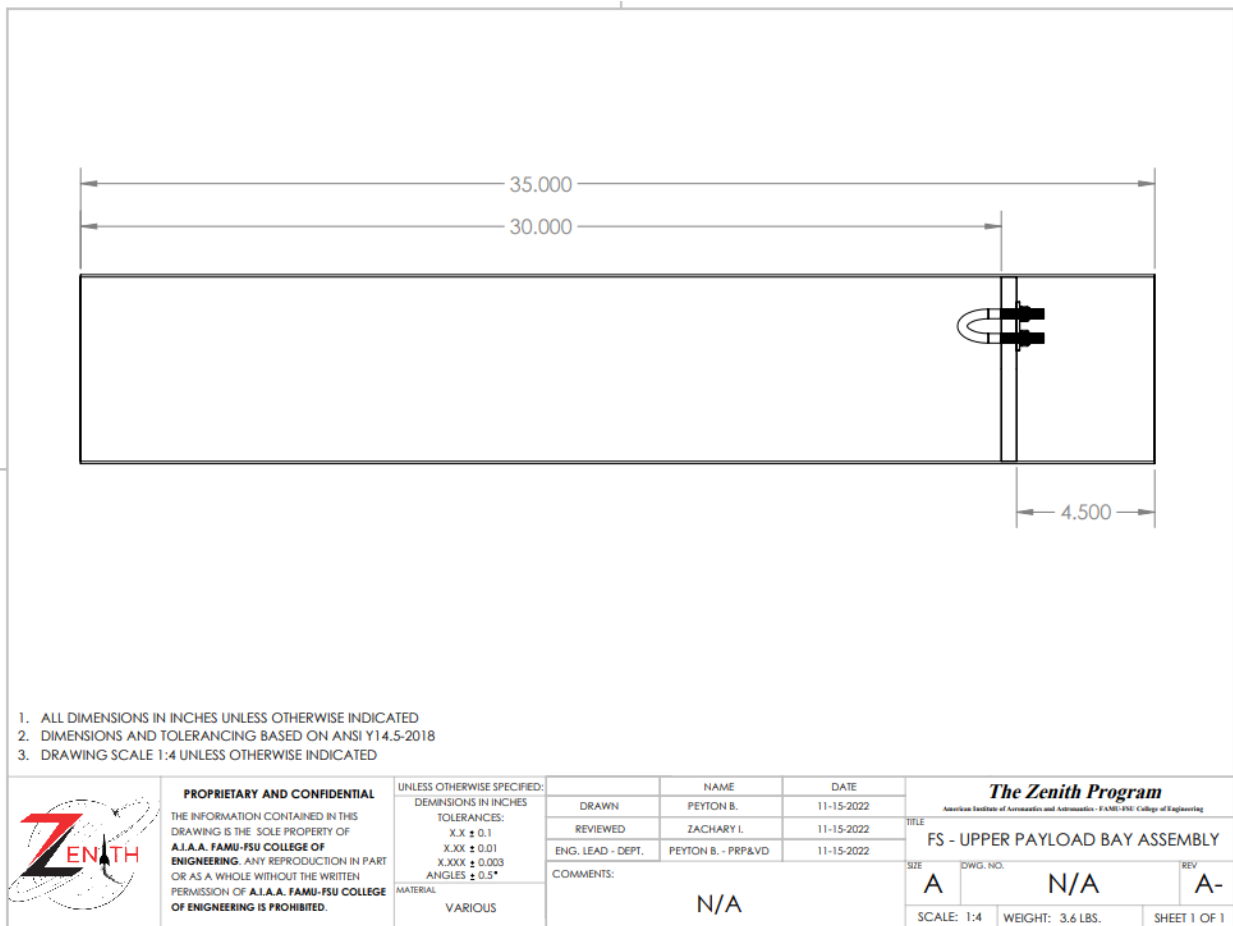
Upper Payload Bay Assembly CAD Drawing
